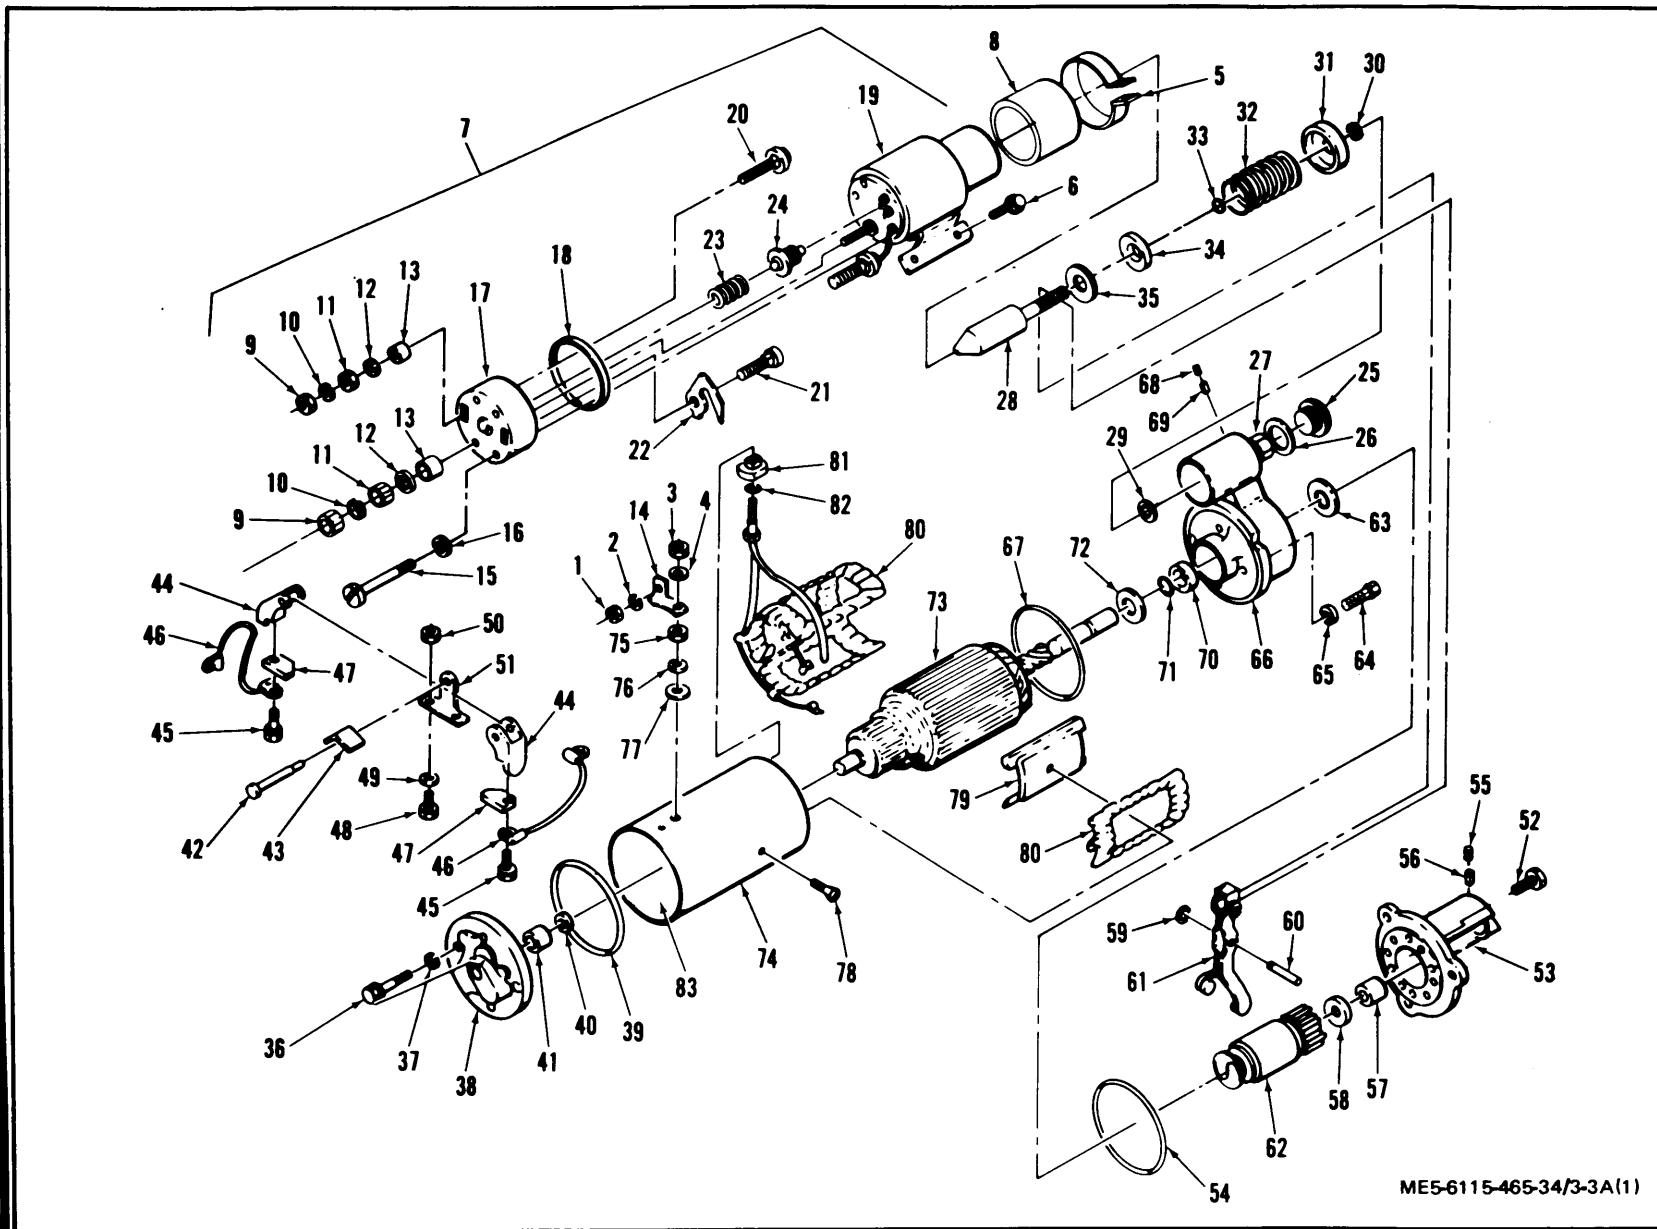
Starter Assembly, Exploded View (Effective with Serial No. RZ70001 and KZ00001 thru KZ02752) (Sheet 1 of 2).
